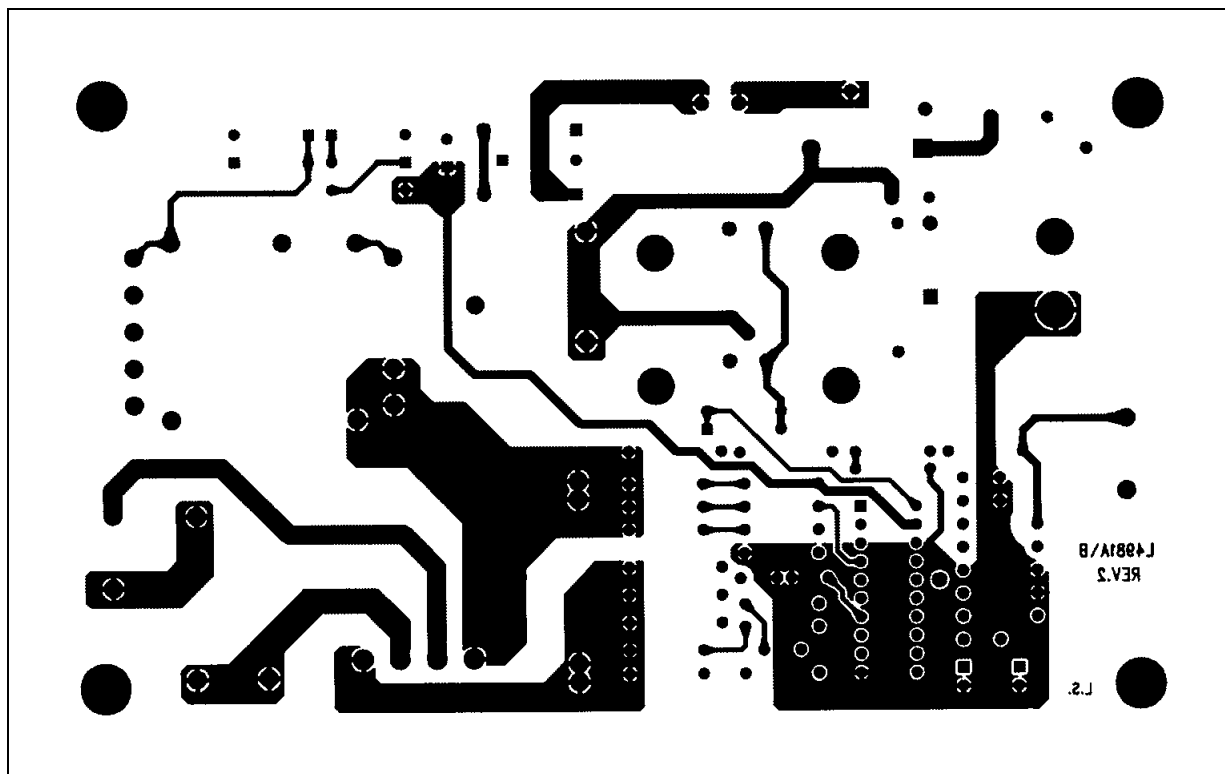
P.C.B. Solder Side (Dimensions 88 x 150mm)
